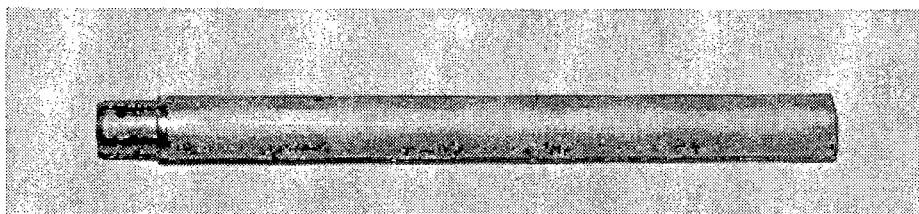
Nb-1% Zr end plug laser welded into Nb-1% Zr sheath tube.
